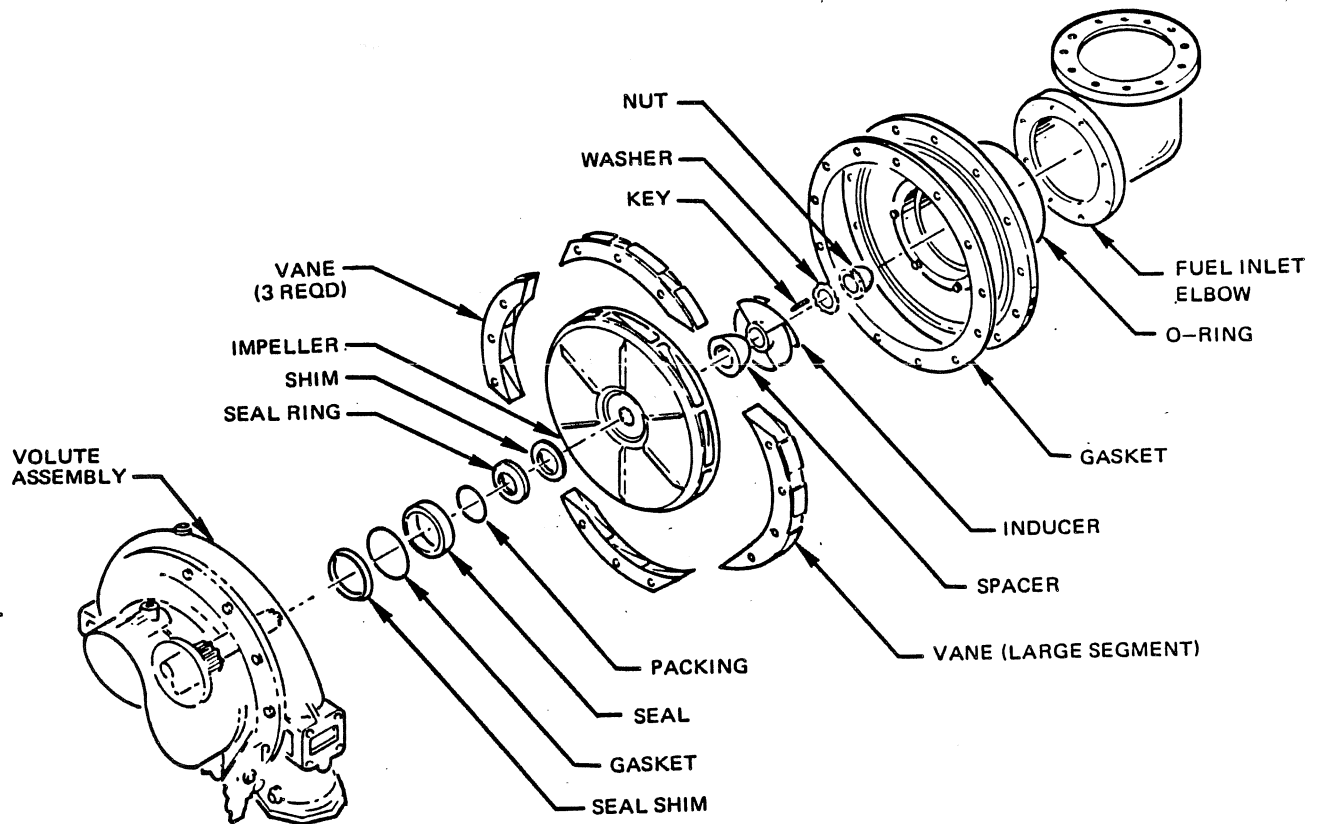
Disassembled View of the Fuel Pump for the Thor MB-3 Engine
